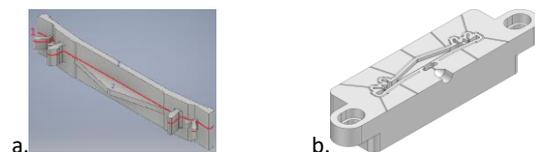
a. CAD representation of the case study part and indication of the parting plane, b. CAD model of the ejector side insert
